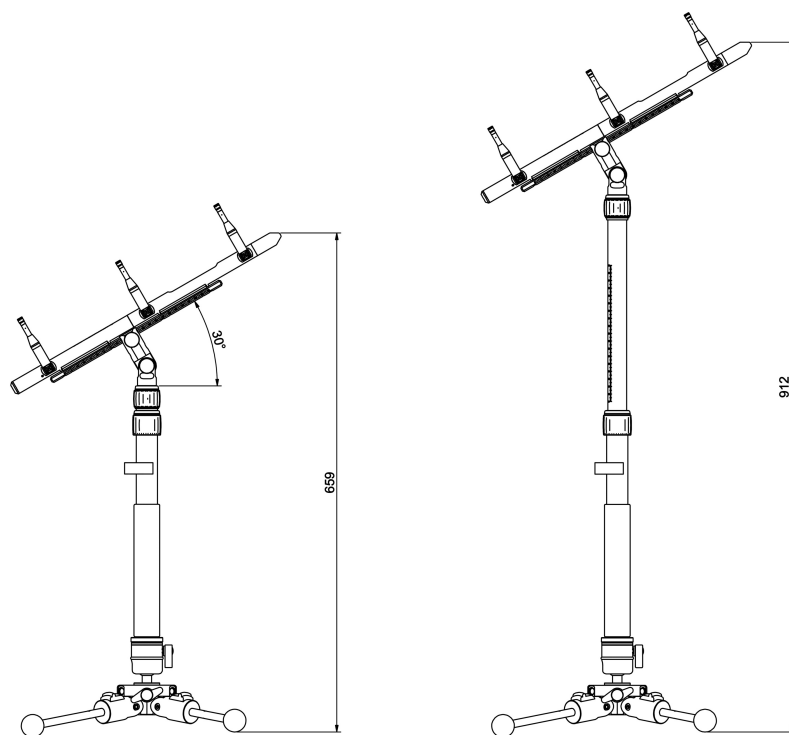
PR0003 array structure: basic dimensions in millimeters.
